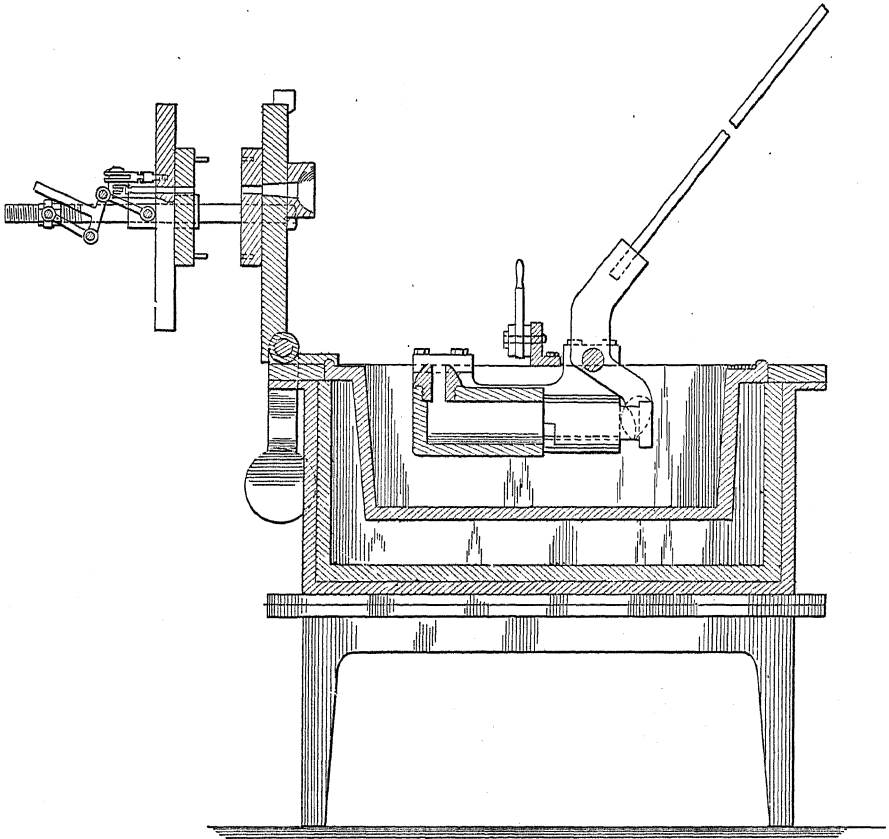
EARLY TYPE OF DOEHLER MACHINE.
